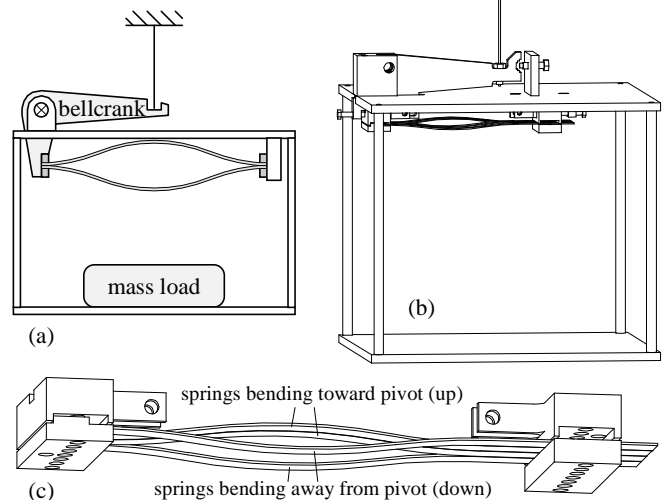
(a) Schematic and (b) Drawing of prototype isolator for testing the Euler spring technique. (c) Detail of spring clamping arrangement.
